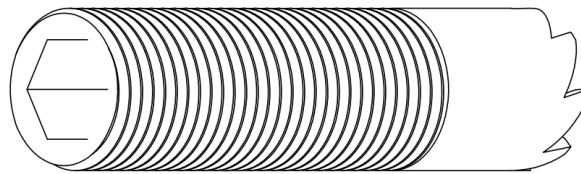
Isometric view of the internal shaft with hole saw cutting tip
